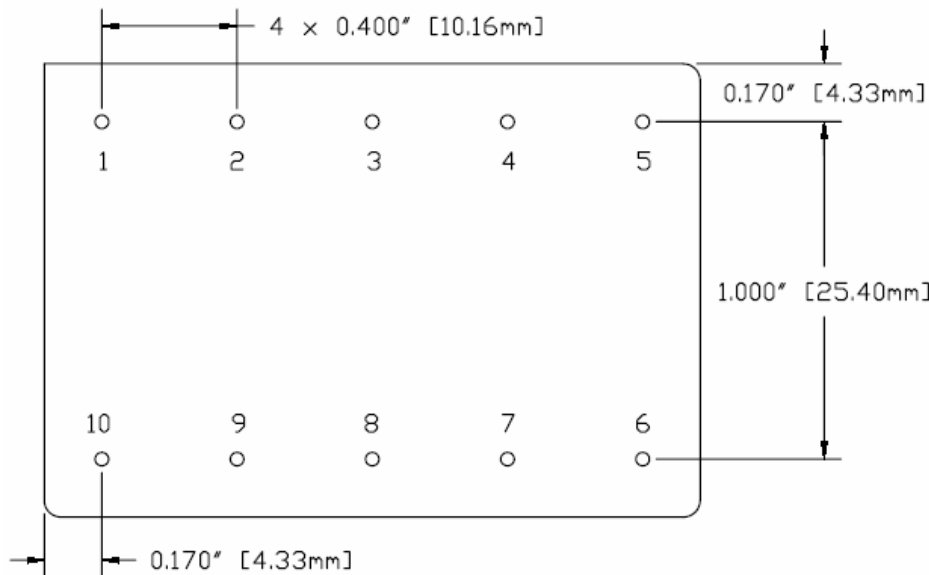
Non-Flanged, Solder Seal Tin Plated Package and Pinout (Not Used for /HB or Higher Screened Products)
